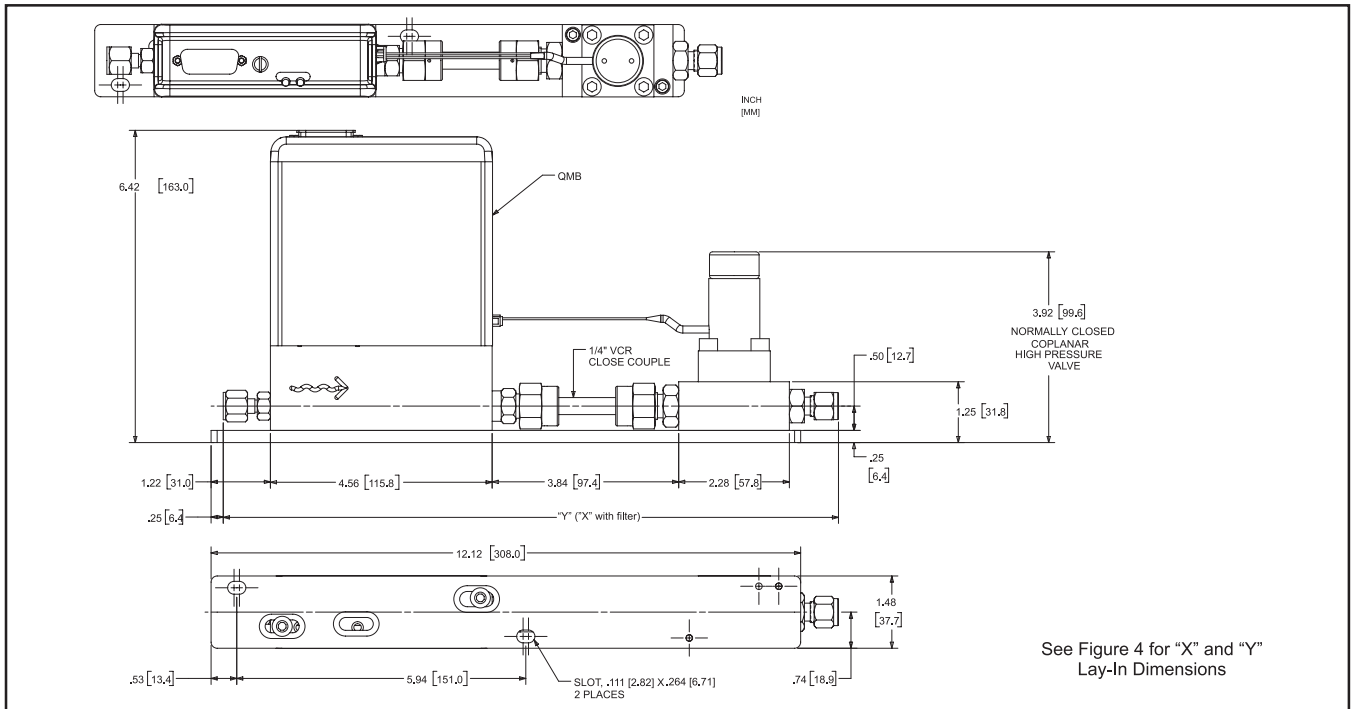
Dimensional Drawing QmB IP40 with Remote Valve
